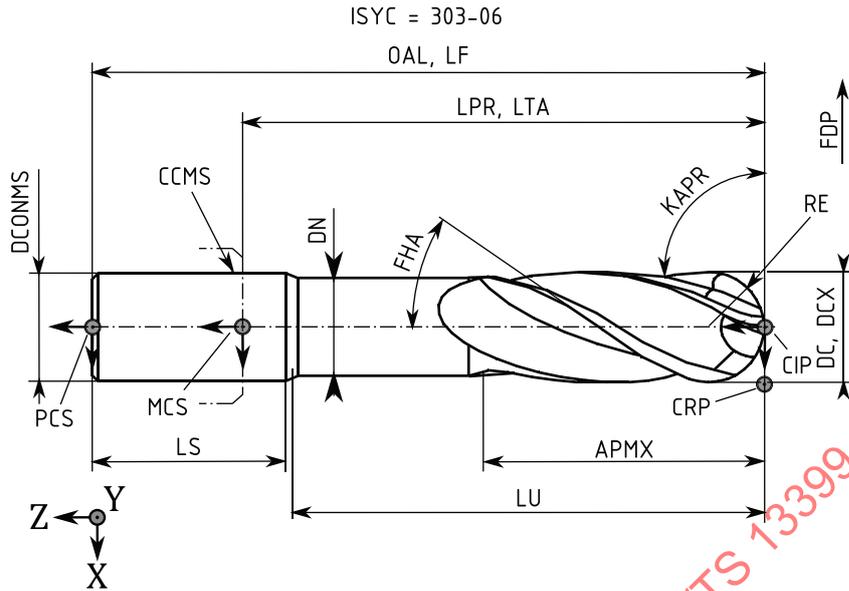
ISYC 303-06 - Ball-nosed end mill, solid
